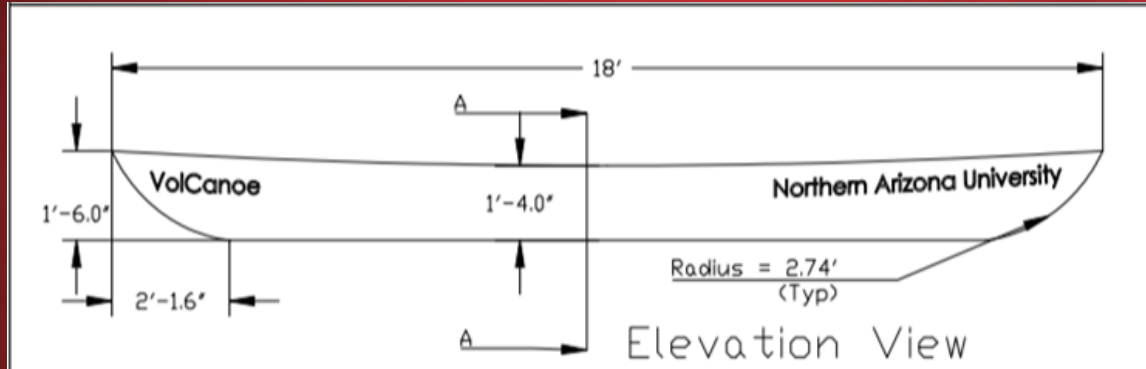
Elevation View from construction drawings submitted to NCCC competition
